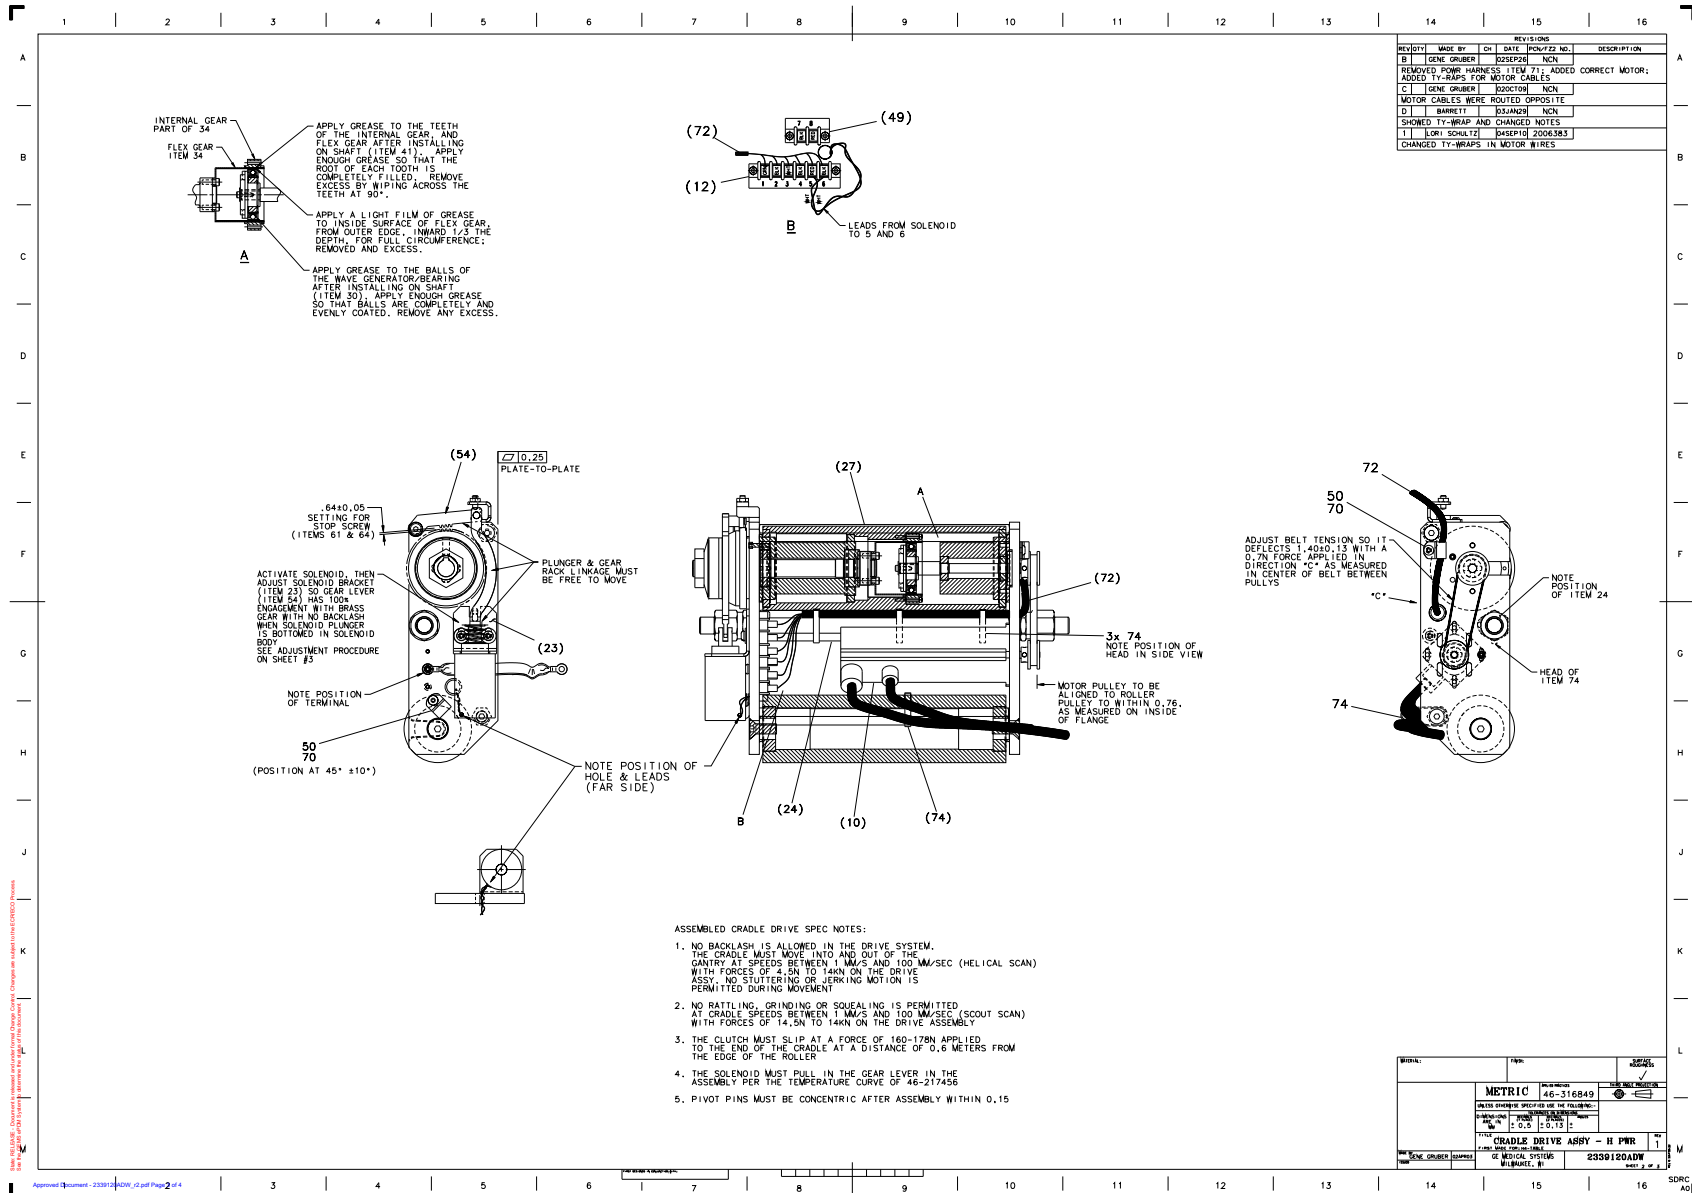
Cradle Drive Assembly (2339120, sheet 2, rev 1)
